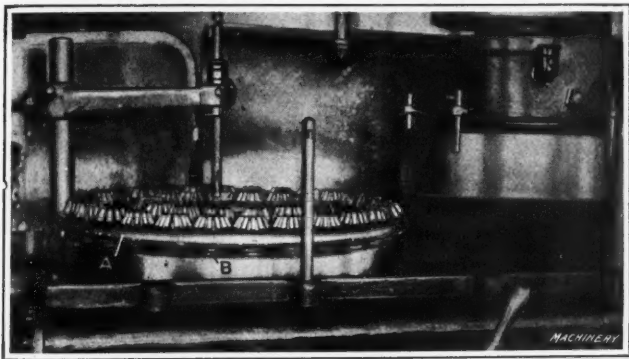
Method of holding and grinding Front Ends of Bevel Pinions on a Blanchard Vertical Surface Grinder
